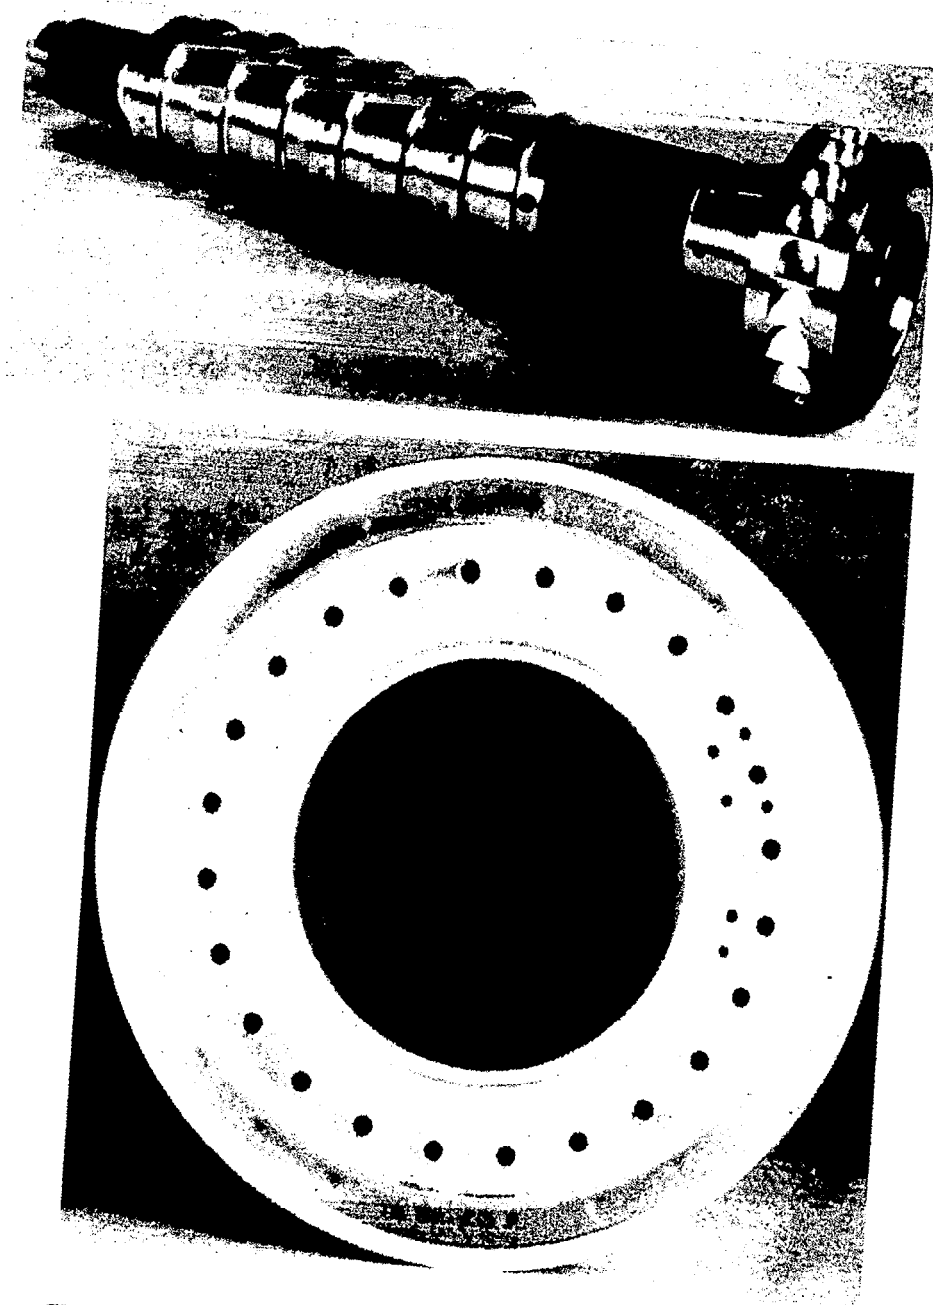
Shaft of Dynamic Simulator and Turbine-End View Showing Heat Exchanger Brazed Inside Journal Bearing
